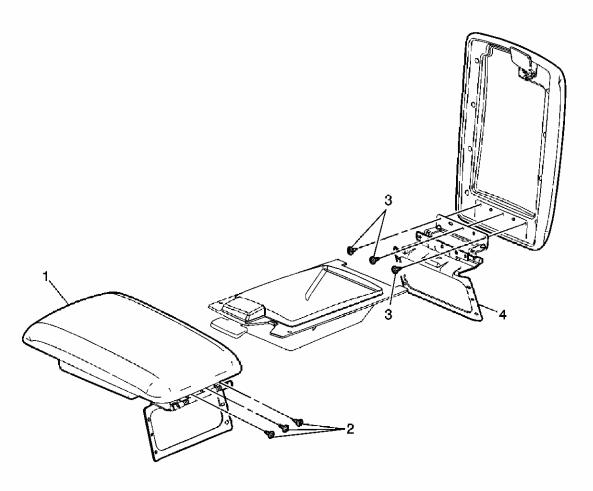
View Of Hinge - Floor Console Arm Rest Courtesy of GENERAL MOTORS CORP.
